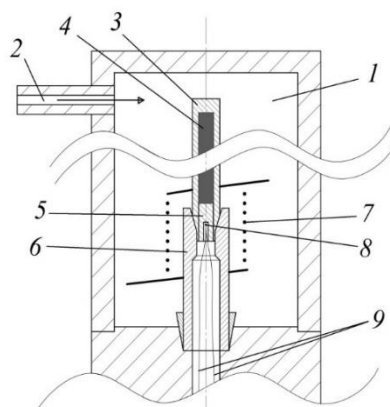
The scheme of the installation of high-temperature gas extrusion. 1 high pressure vessel, 2 inlet gas pipeline, 3 sample for extrusion, 4 Ni–Al compacted powder, 5 plug with axial drilling for thermocouple, 6 gas extrusion matrix, 7 heater, 8 thermocouple, 9 pins for temperature measurement.
